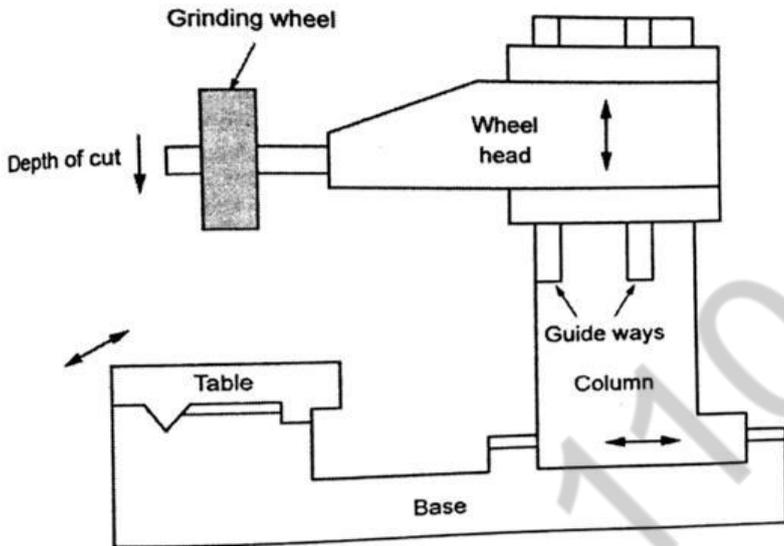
Horizontal spindle reciprocating table surface grinder
